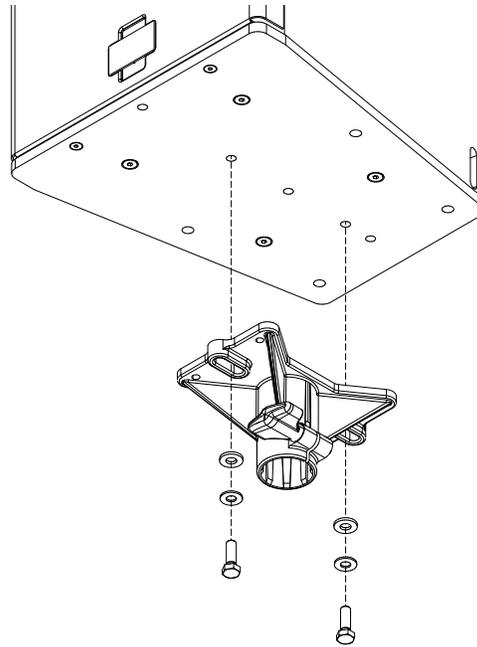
Attaching a Pole Stand Adapter to UPJ-1P Bottom
